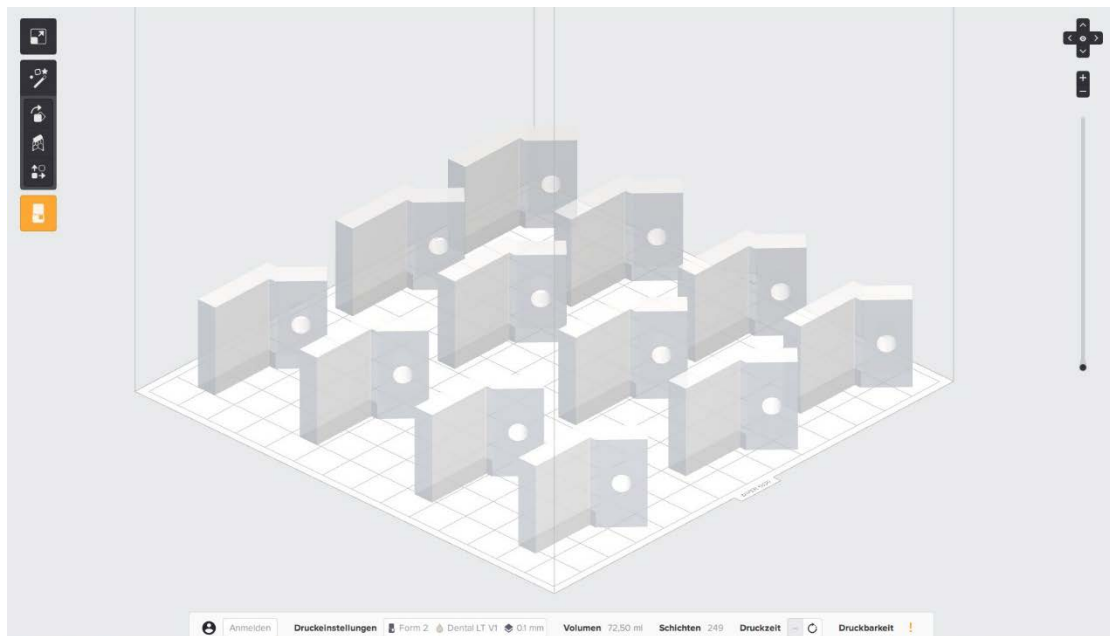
The printing direction and layout of the SLA-printed test blocks. Twelve specimens were set to be printed directly on the printing platform without supporting material.
